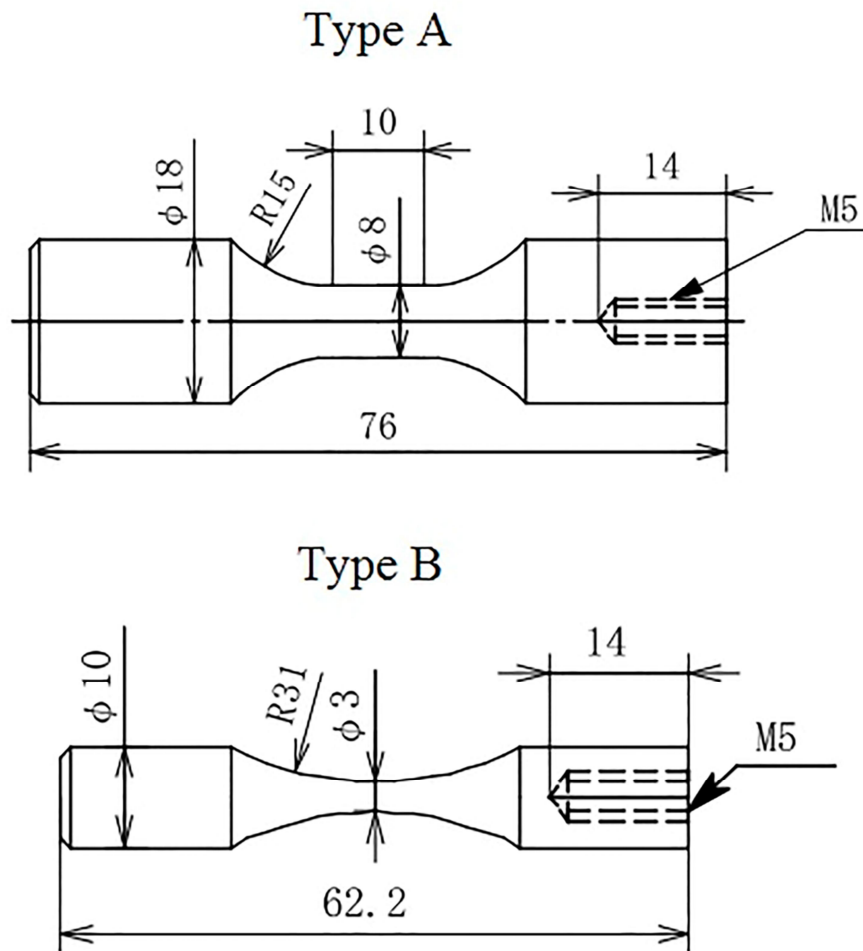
Detail drawings of (a) $\varnothing 8$ and (b) $\varnothing 3$ specimens (all dimensions are in mm). Adapted from [84]
